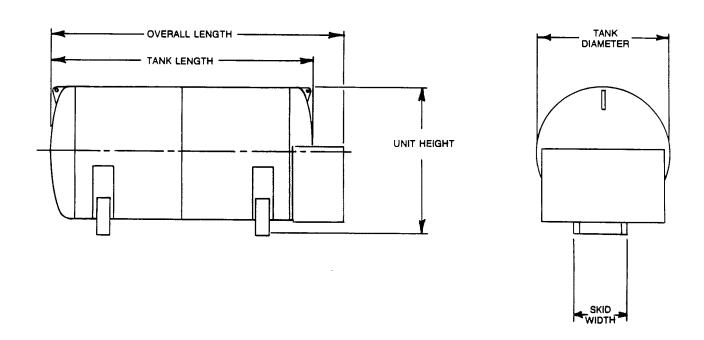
Outline Drawing Chassis Mounting Liquid Delivery Units
